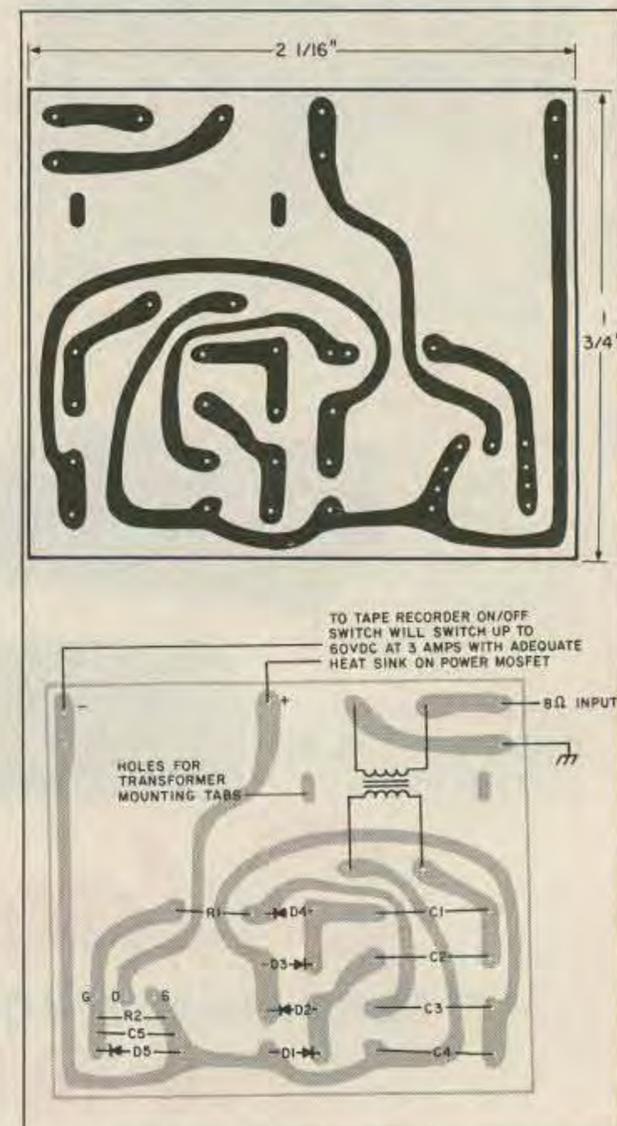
(a) PC board foil pattern. (b) Parts placement.
